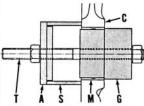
Removal of front or rear main bearing requires use of Yanmar special tool number 124085-92400 for all models except 3HM which uses special tool number 128670-92400. Install special tool as shown and draw old bearing (M) out through front of cylinder block (C).
